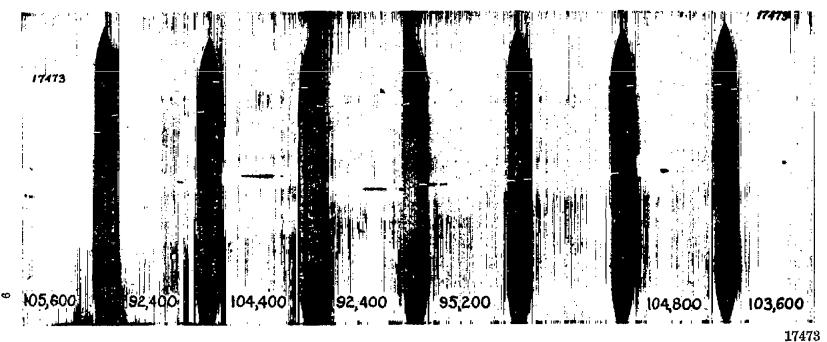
Radiograph of metal-arc-welded static tension specimens in 1/s-inch SAE 4130 sheet.
